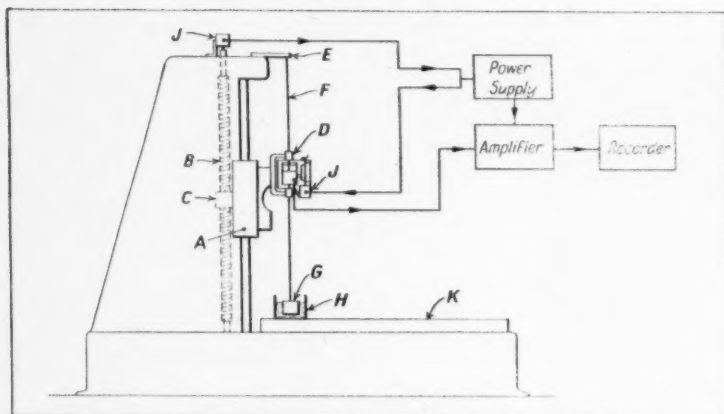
Application of the Equipment to a Gear Hobbing Machine: A—Saddle, B—Feed Screw, C—Nut, D—Measuring Head, E—Wire Support, F—Wire, G—Loading Mass, H—Oil Pot, J—Mag-slip, K—Work Table
